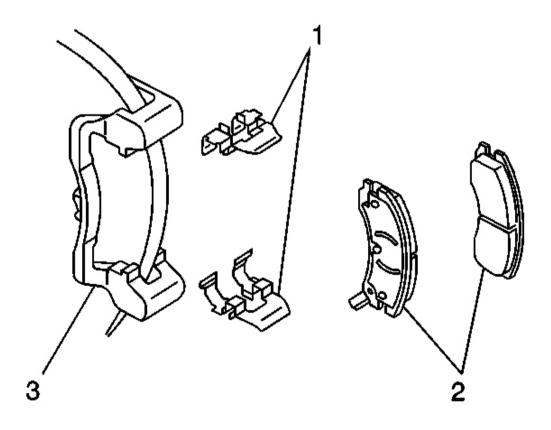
Identifying Brake Components Courtesy of GENERAL MOTORS CORP.
